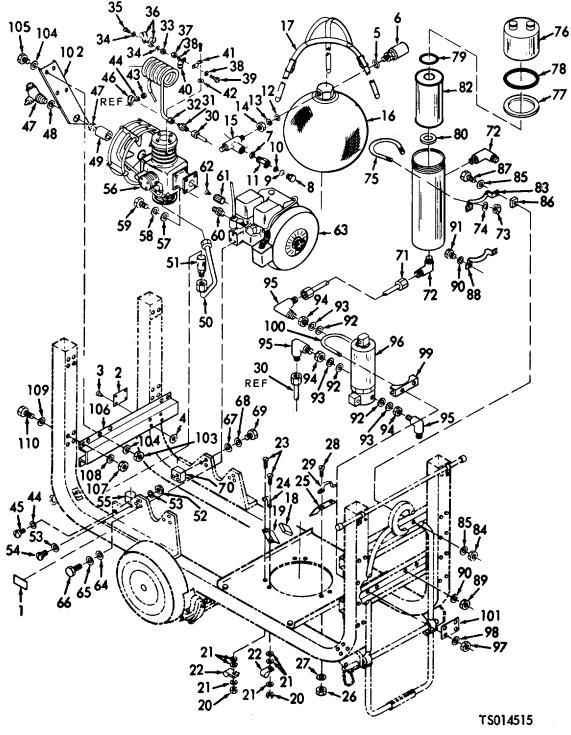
Engine and Compressor Assembly (Sheet 1 of 2).
